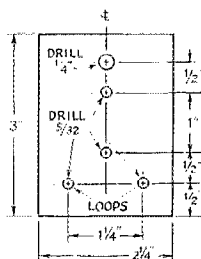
The insulating mounting for the driven element is made from a piece of 3/8-inch Plexiglas, cut and drilled as indicated.
